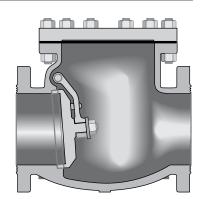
Flanged Figure 147½ Butt Weld
